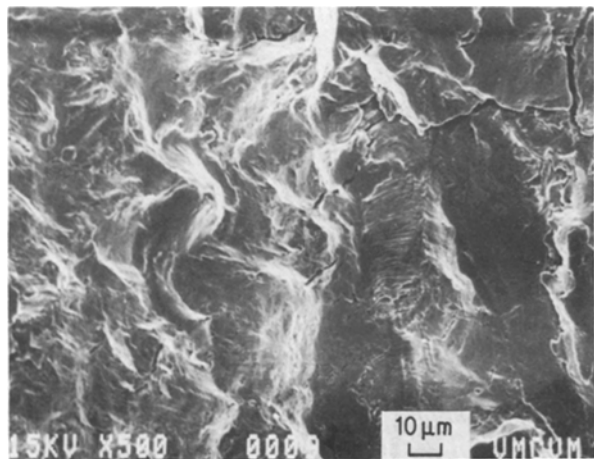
Failure showing fatigue striations remote from the weld.
